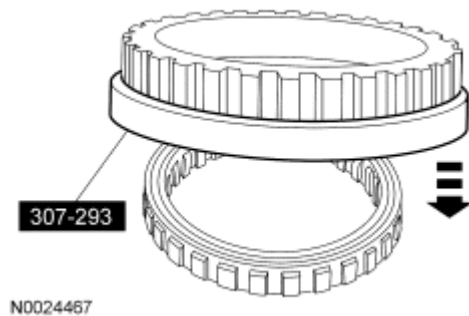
Installing One-Way Clutch Bearing Into One-Way Outer Race Using Special Tools
